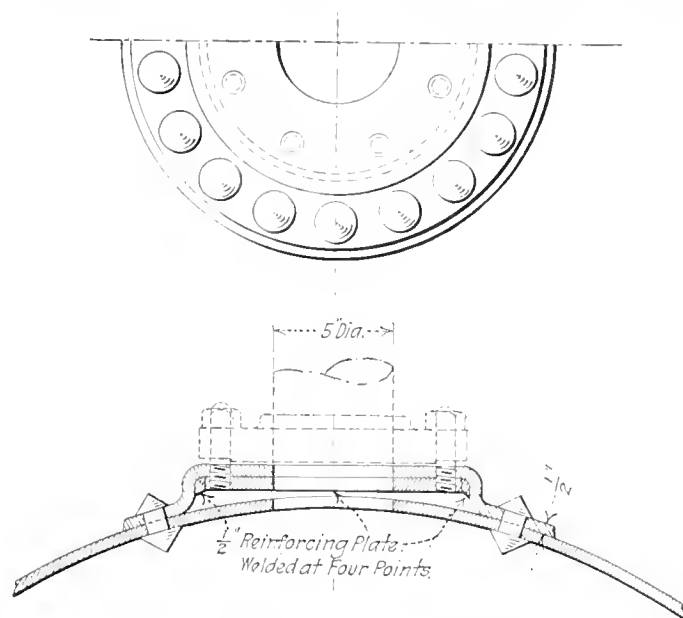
PRESSED STEEL FLANGE FOR USE AS BOILER NOZZLE
